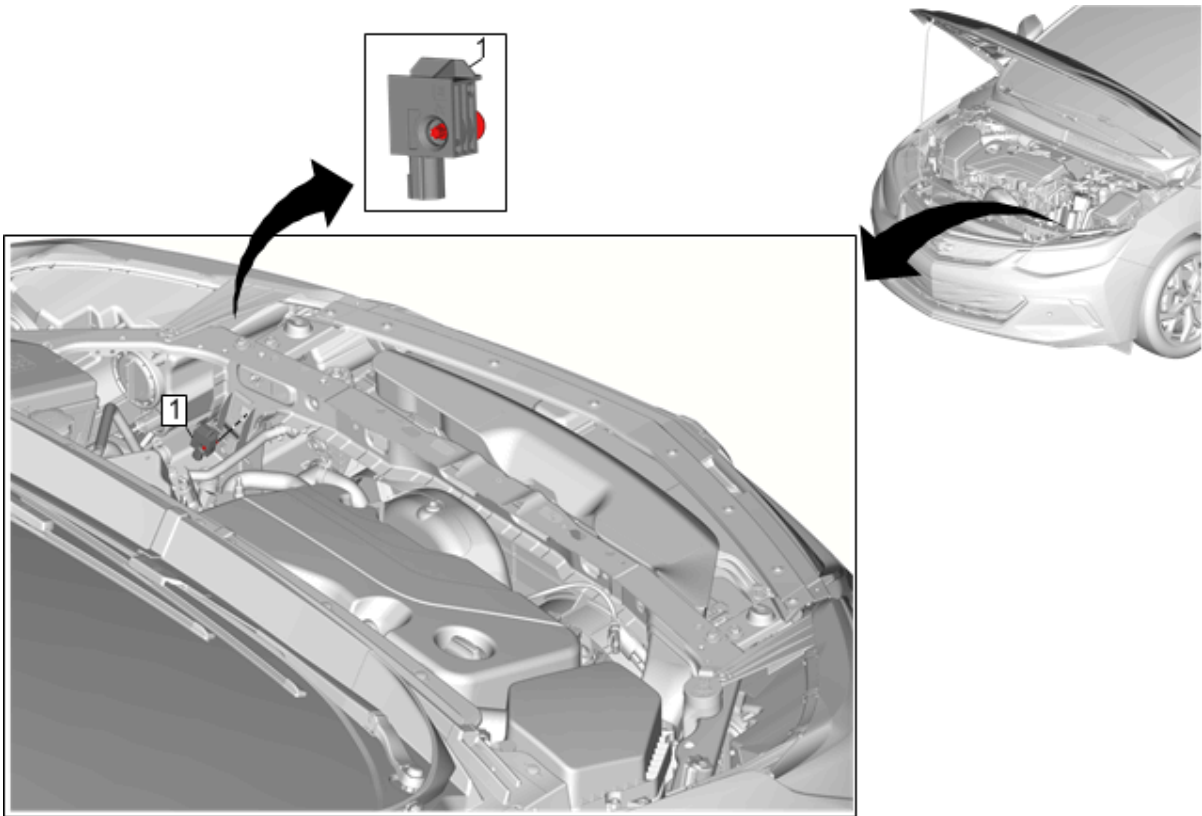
Airbag Front End Discriminating Sensor - Left Side
